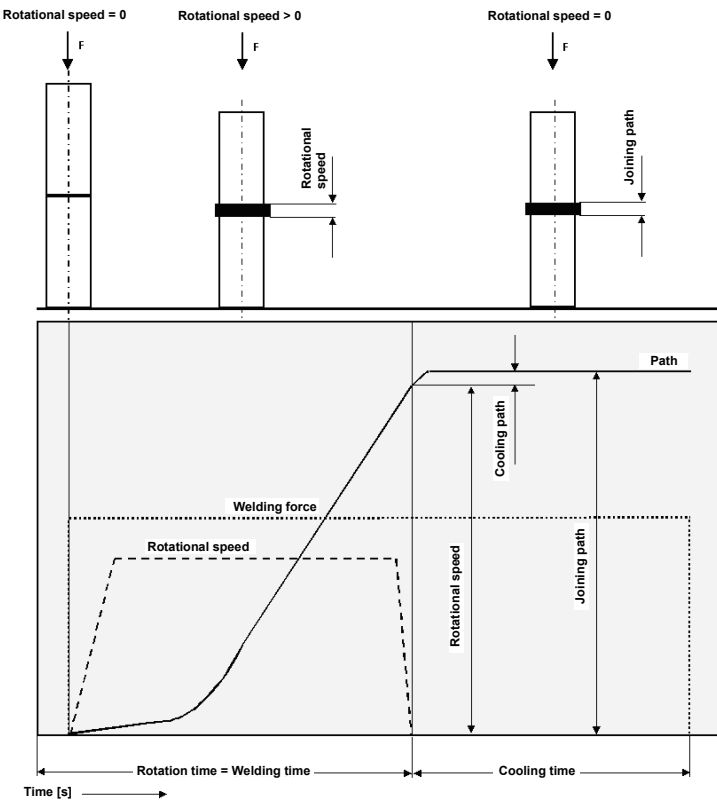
Principle of rotational welding of a butt joint. The procedural diagram in the case of the servo motor does not show the welding force, but instead merely a regulated insert speed to the end position.
